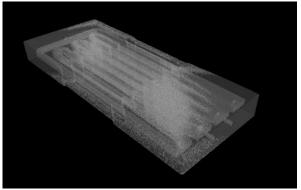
Inspection of Powder stuck inside the LHP using Phoenix Vtomex S240 CT scan machine.
